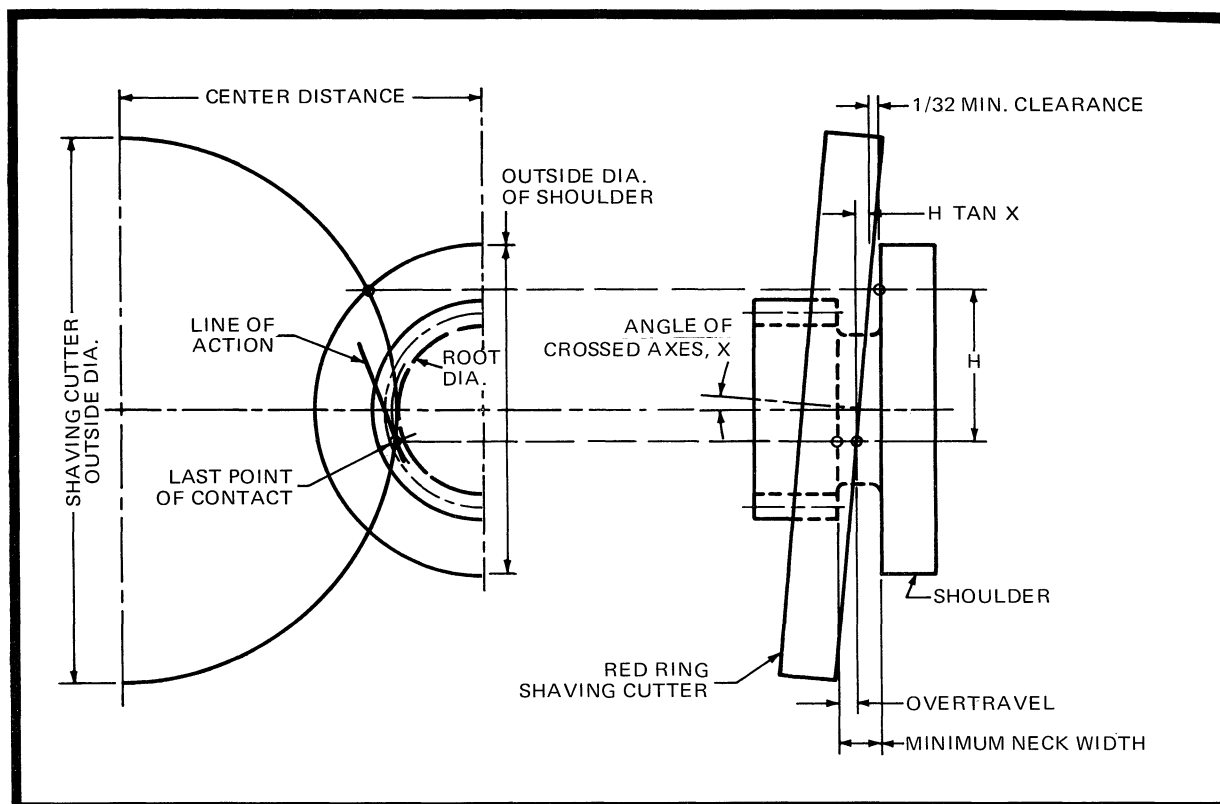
Limitation of crossed axes angle on shoulder gears.
